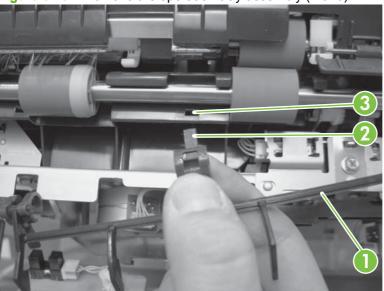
Remove the operation-tray assembly (2 of 6)
